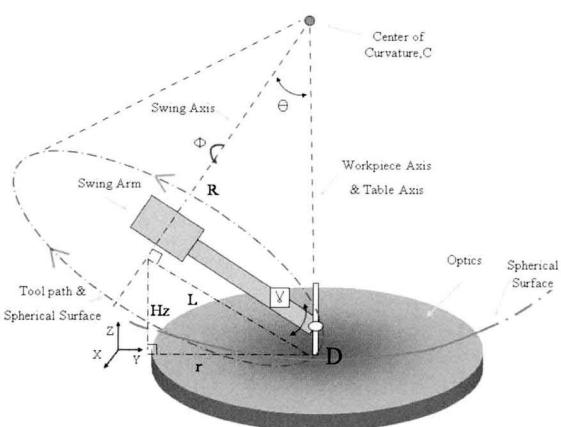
Mechanism of a Swing-Arm Polishing Machine
